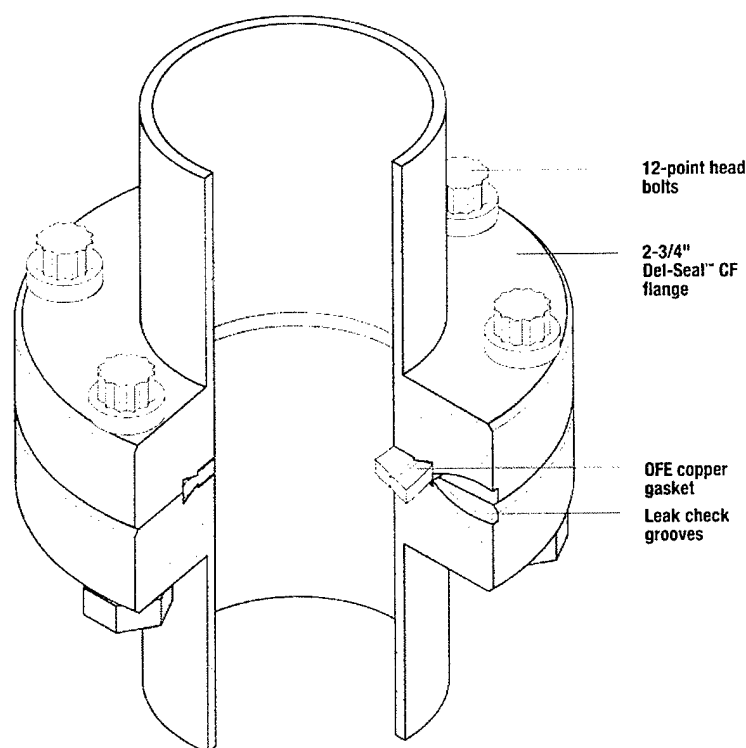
Typical installation of Del-Seal™ Flange [From Ref. 40]
